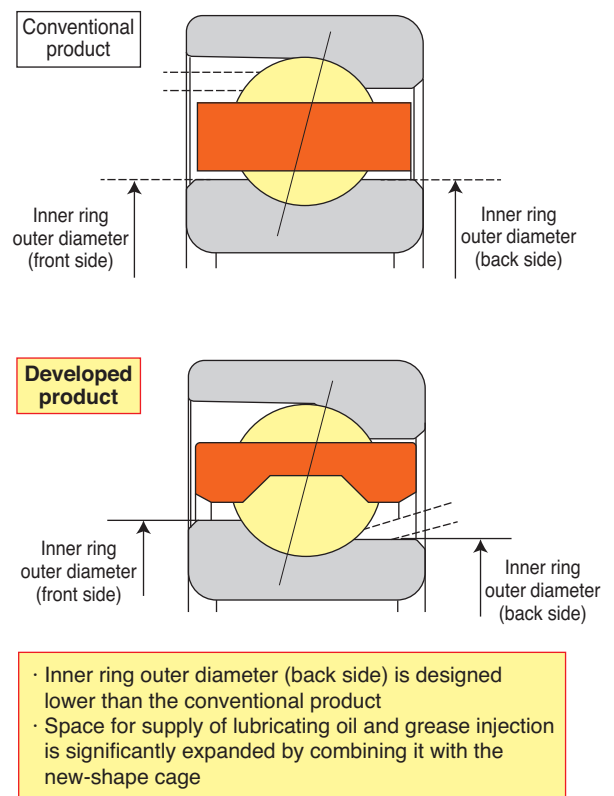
Section of ULTAGE precision standard angular contact ball bearing 72U series
